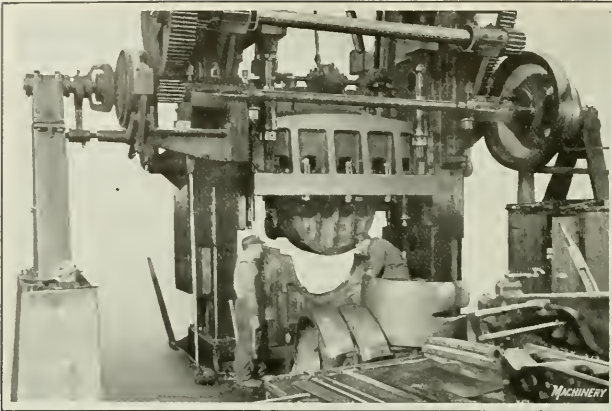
Another Large-sized Toggle Drawing Press making Mud Guards
